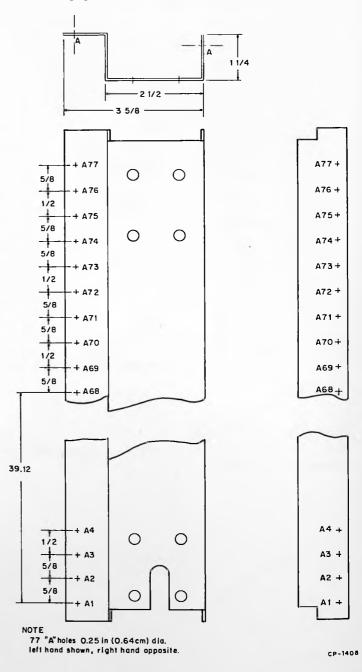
H957-AA Cabinet Frame Front and Rear Vertical Rail Mounting Hole Locations
